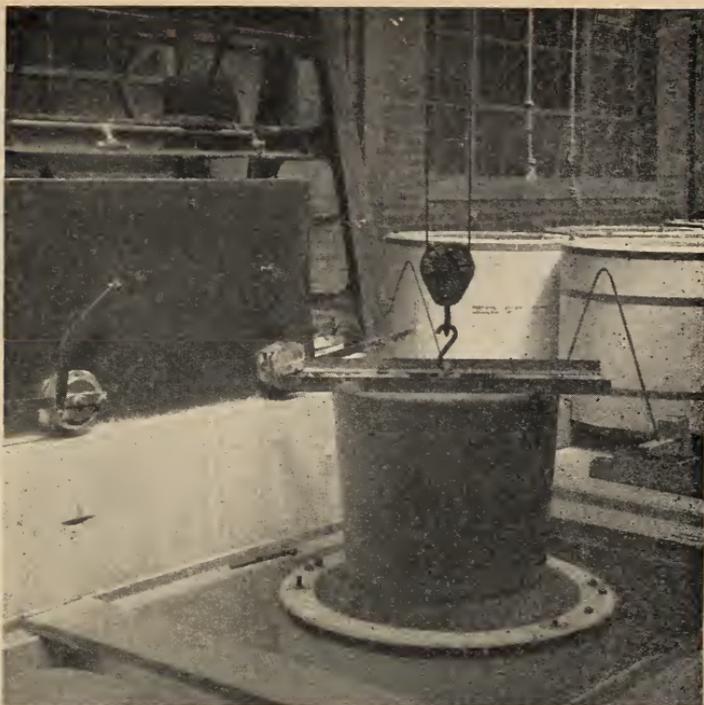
Slip-coated core being lowered into the shell of the mold.
